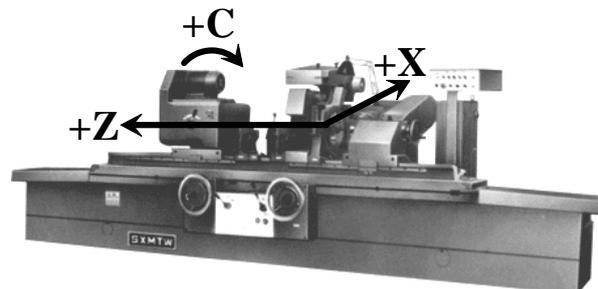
The machine coordinate system of the cylindrical grinding machine
